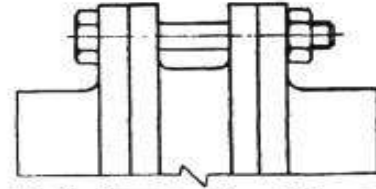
Butterfly Valve, U-Section Wafer Type
